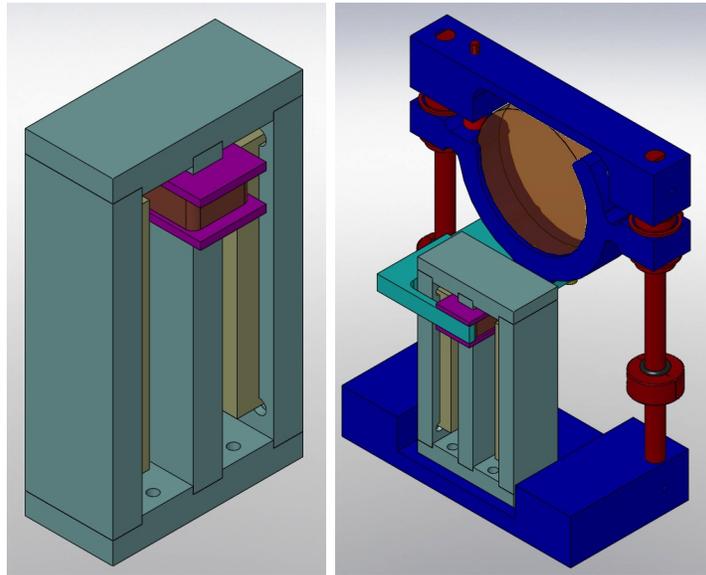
Left: A sketch of a linear motor with moving coil. Right: The motor integrated with the moving mirror. The interface piece is shown in cyan.
